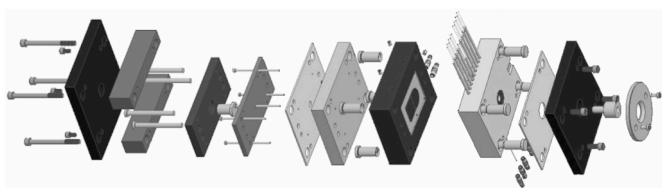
Experimental tool used in this work, mould with electrical lines used for rapid heating.
